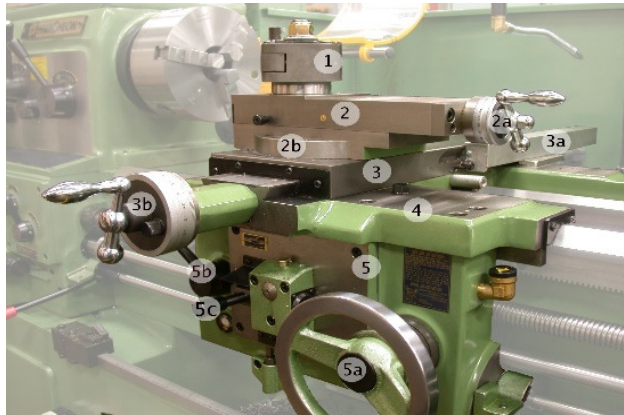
Illustrates the Assembly Parts of the Carriage in the Lathe Machine.
